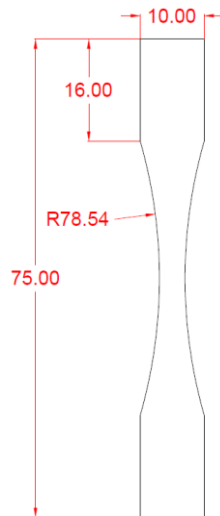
Two-dimensional drawing of the tensile testing specimen.
